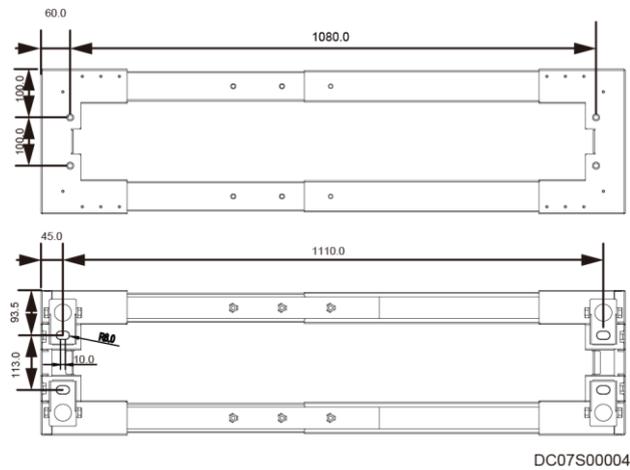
600 mm wide base hole dimensions (Unit: mm)
